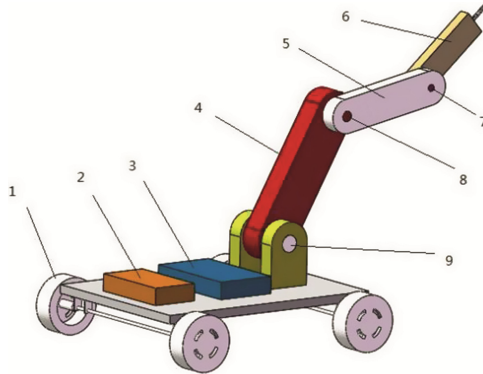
Three - dimensional simplified model of mobile handling robot. 1-Mobile platform, 2-Additional weight, 3-Controller, 4-Big arm, 5-Middle arm, 6-End arm, 7-Joint 3, 8-Joint 2, 9-Joint 1
